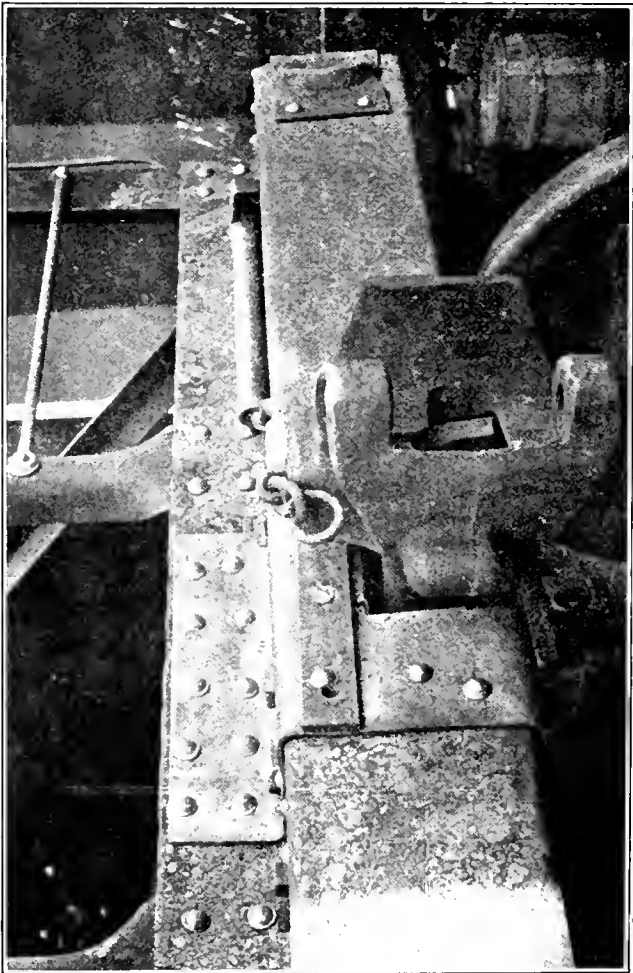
DAMAGED END SILL REPAIRED AND IN PLACE ON THE CAR.
